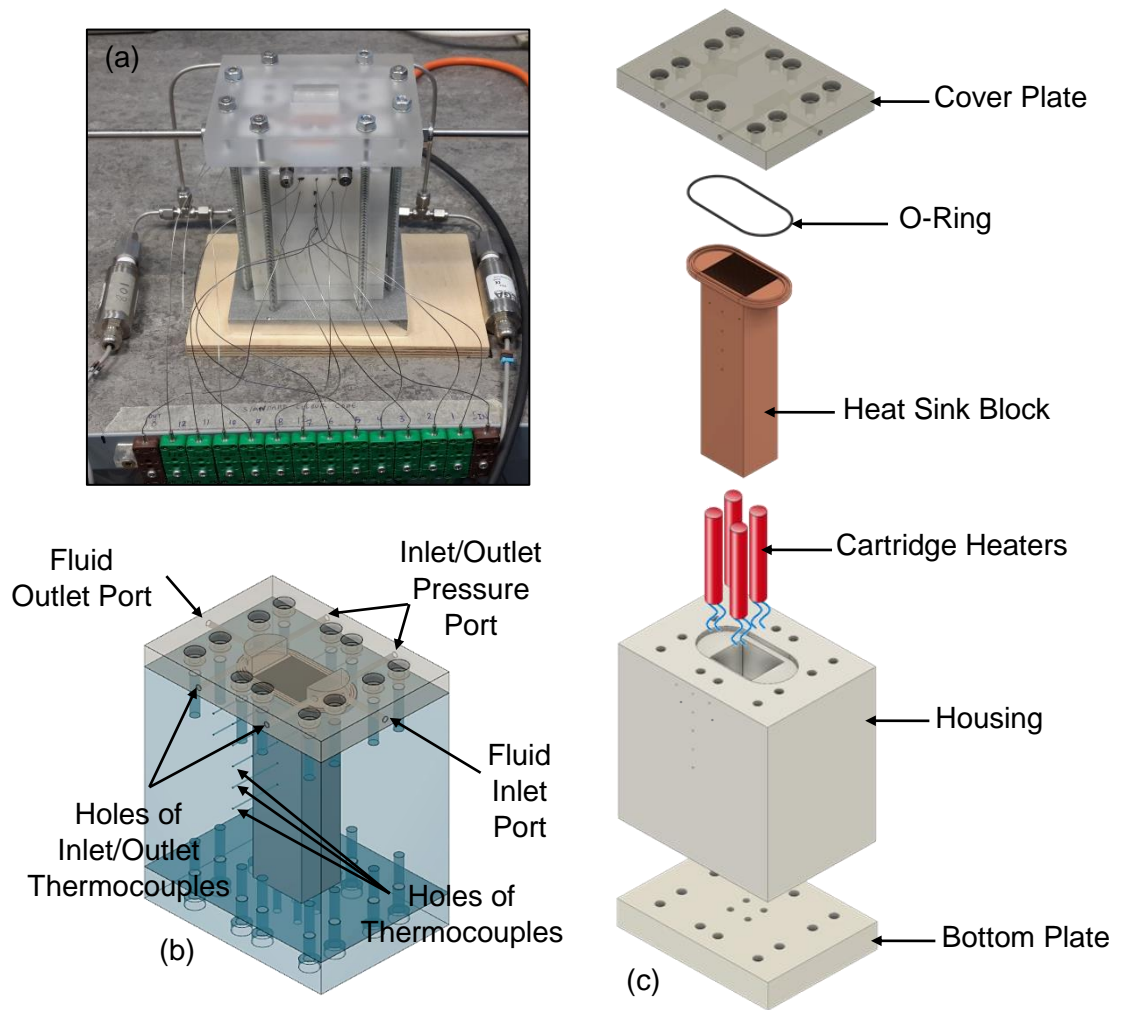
Test section construction, microchannel evaporator: (a) Photograph (b) Overall assembly (c) Exploded drawing.
